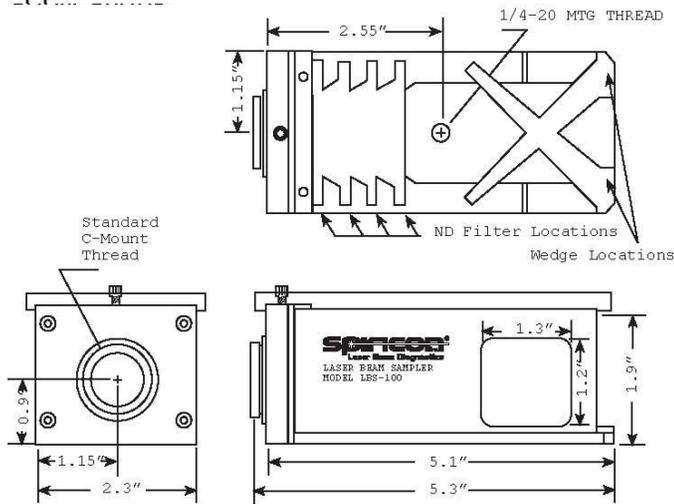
Mechanical drawing of LBS-100 Beam Samplers.
